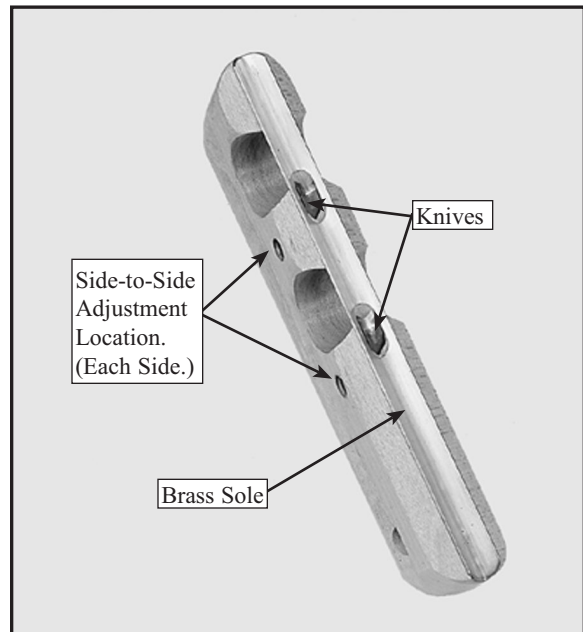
The underside of the slickplane. The side-to-side adjustment locations are shown.
